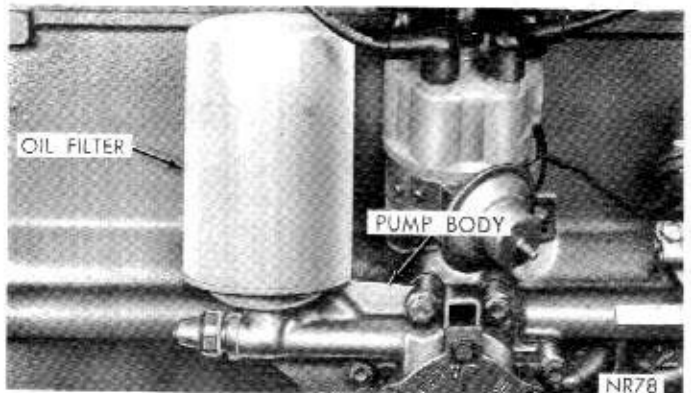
Engine Oil Filter (6 Cylinder Engines)
